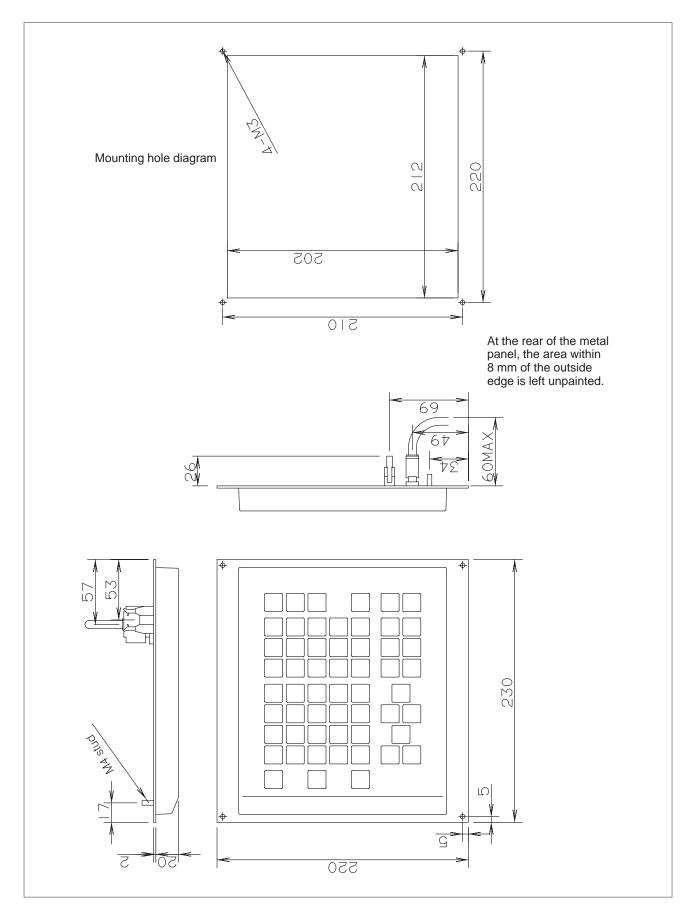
External dimensions of separate-type standard MDI unit (horizontal type)
